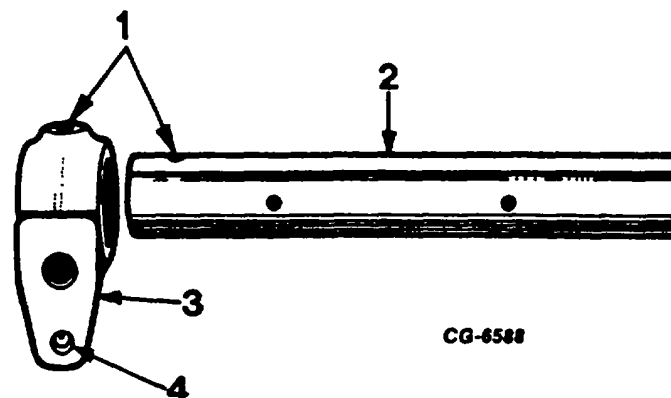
Aligning Holes in Rocker Arm Shaft and Support
